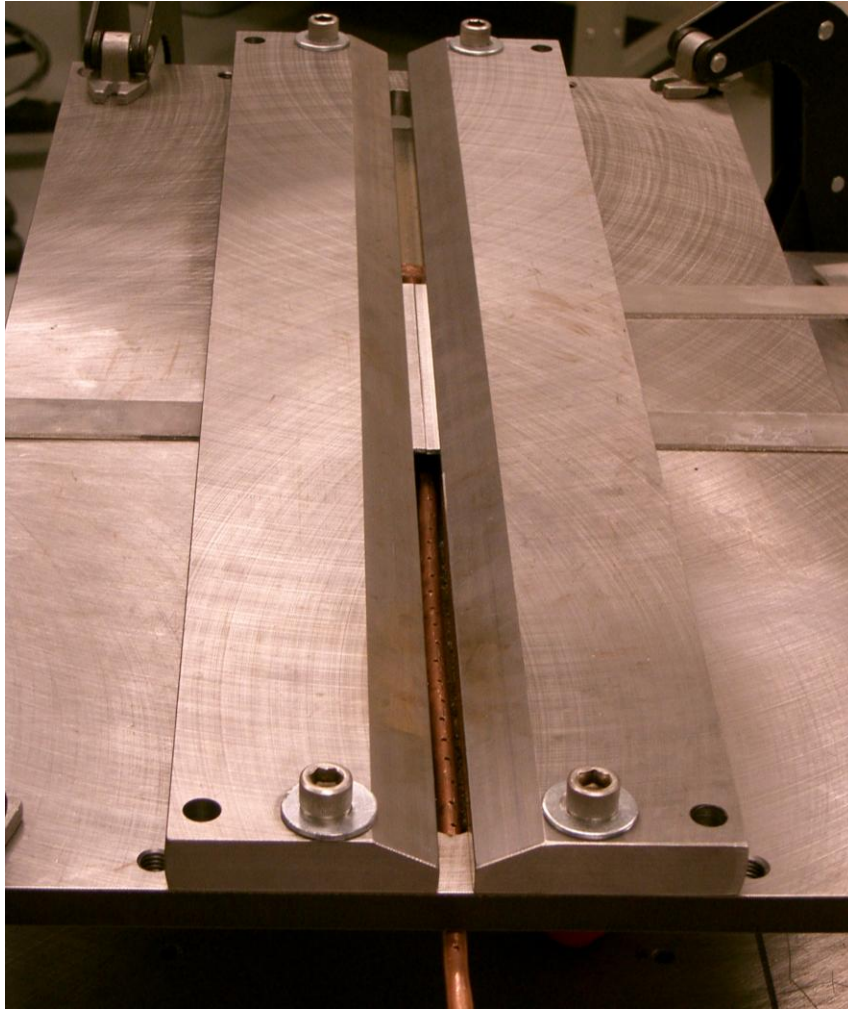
The fibre laser welding fixture with perforated copper tube used for back shielding.
